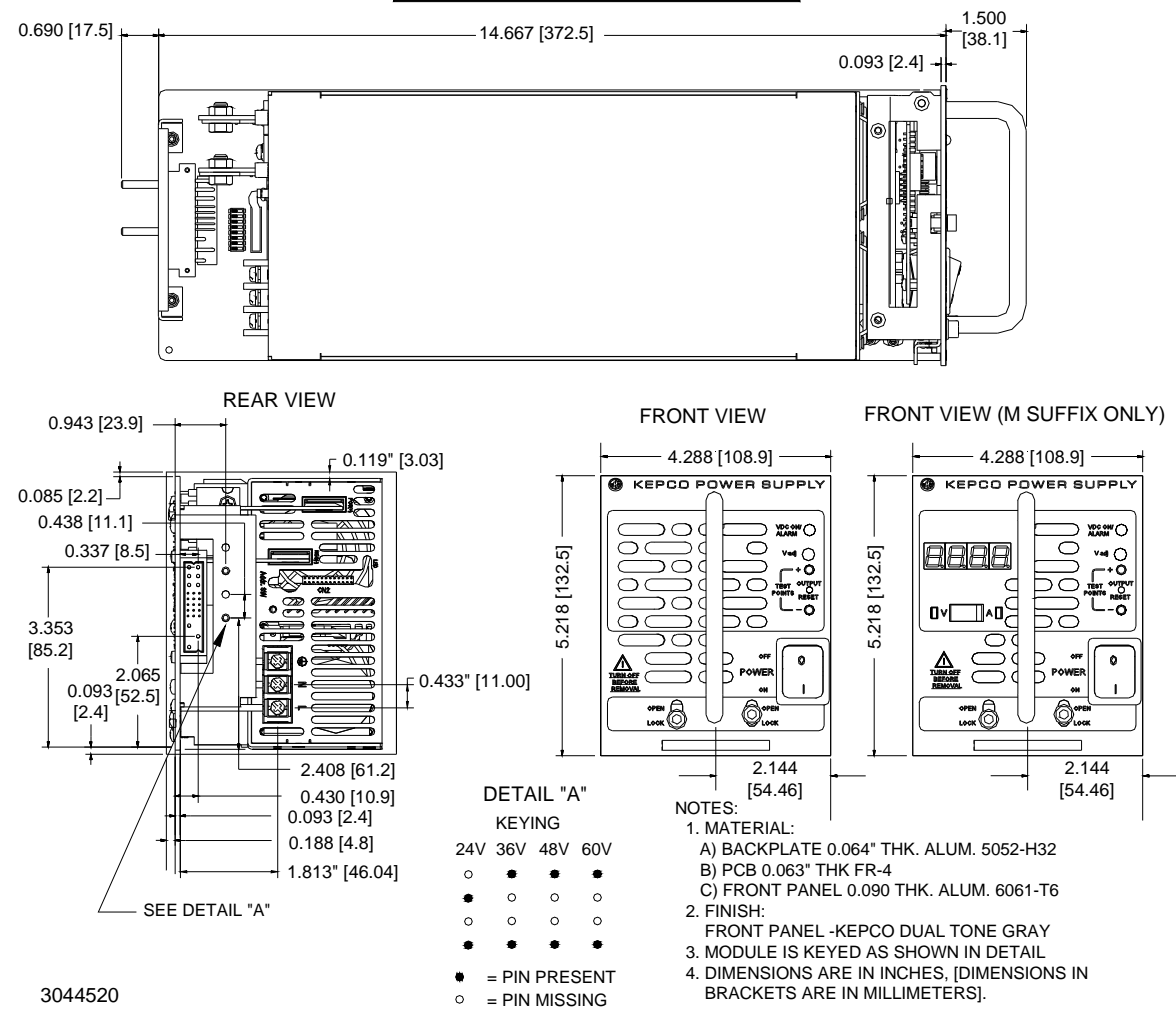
MECHANICAL OUTLINE DRAWING OF HSF 1500W POWER SUPPLY
